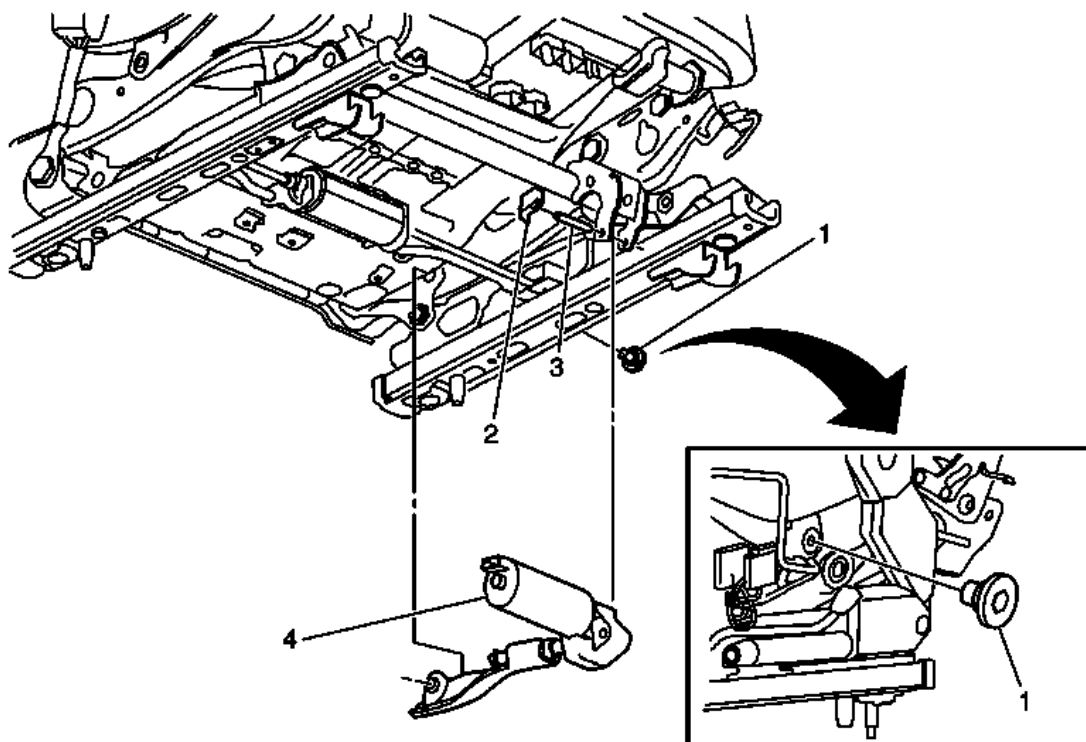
Driver or Passenger Seat Vertical Adjuster Actuator
